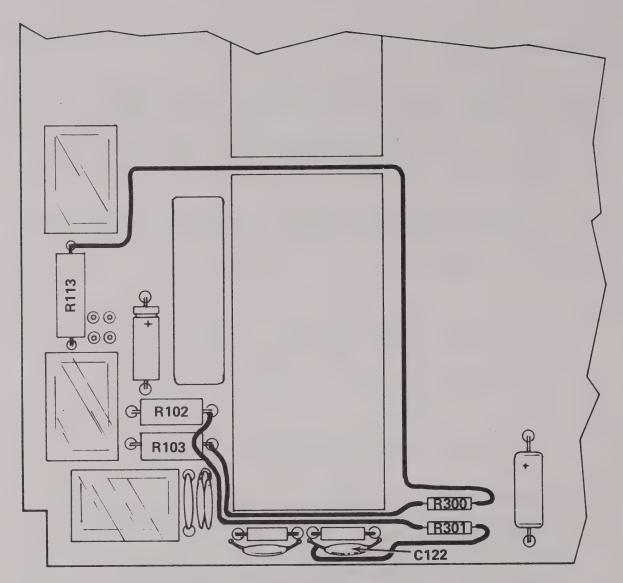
A. Component Side of I/O Trunk Board TRN6469A Showing Location of Resistors R300 and R301
